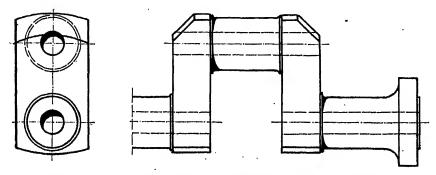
and 108.—Built-up Crank Shaft for High-power Marine Engines.
